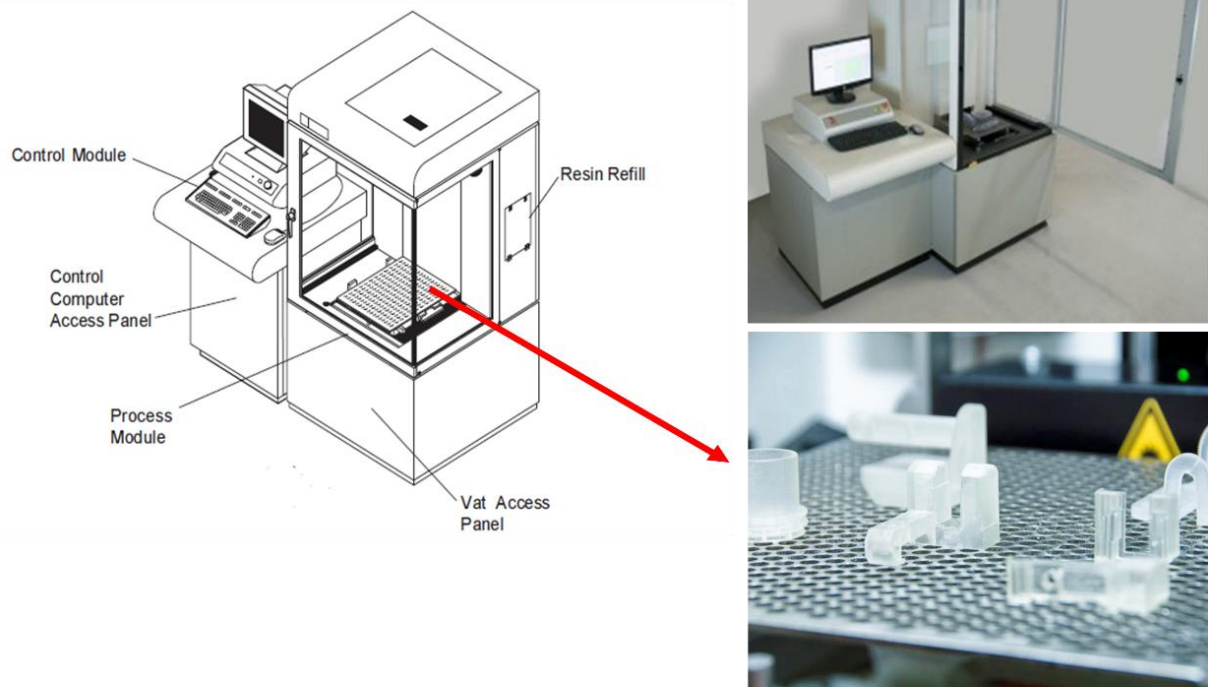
Schematic representation and actual images of the SLA-3500 3D printer setup, including the aluminum 3D printing platform.
